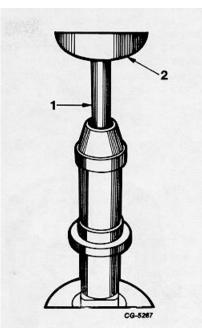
Bushing Remover SE-1955-5 Installed in Upper Bushing
